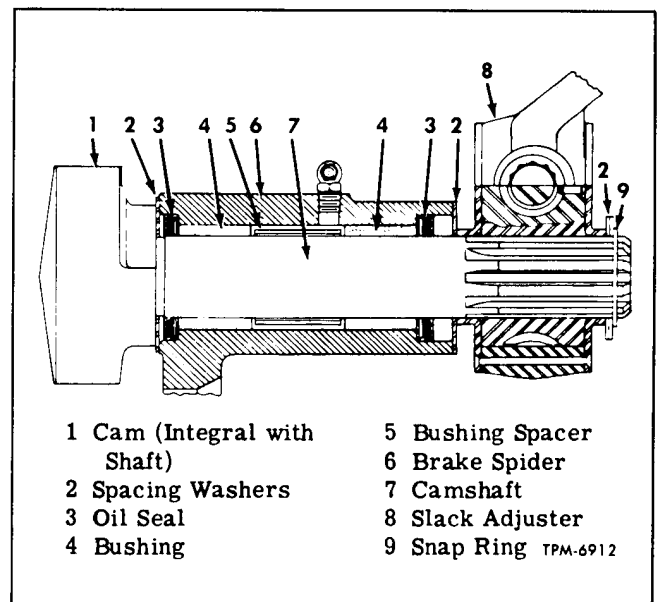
Front Brake Camshaft and Slack Adjuster Mounting
